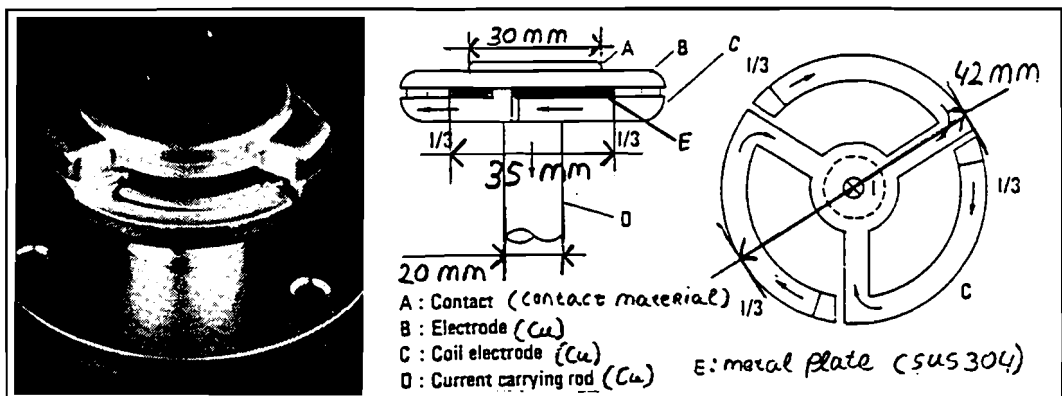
Photograph and drawing of the used contacts that generate an axial magnetic field.
